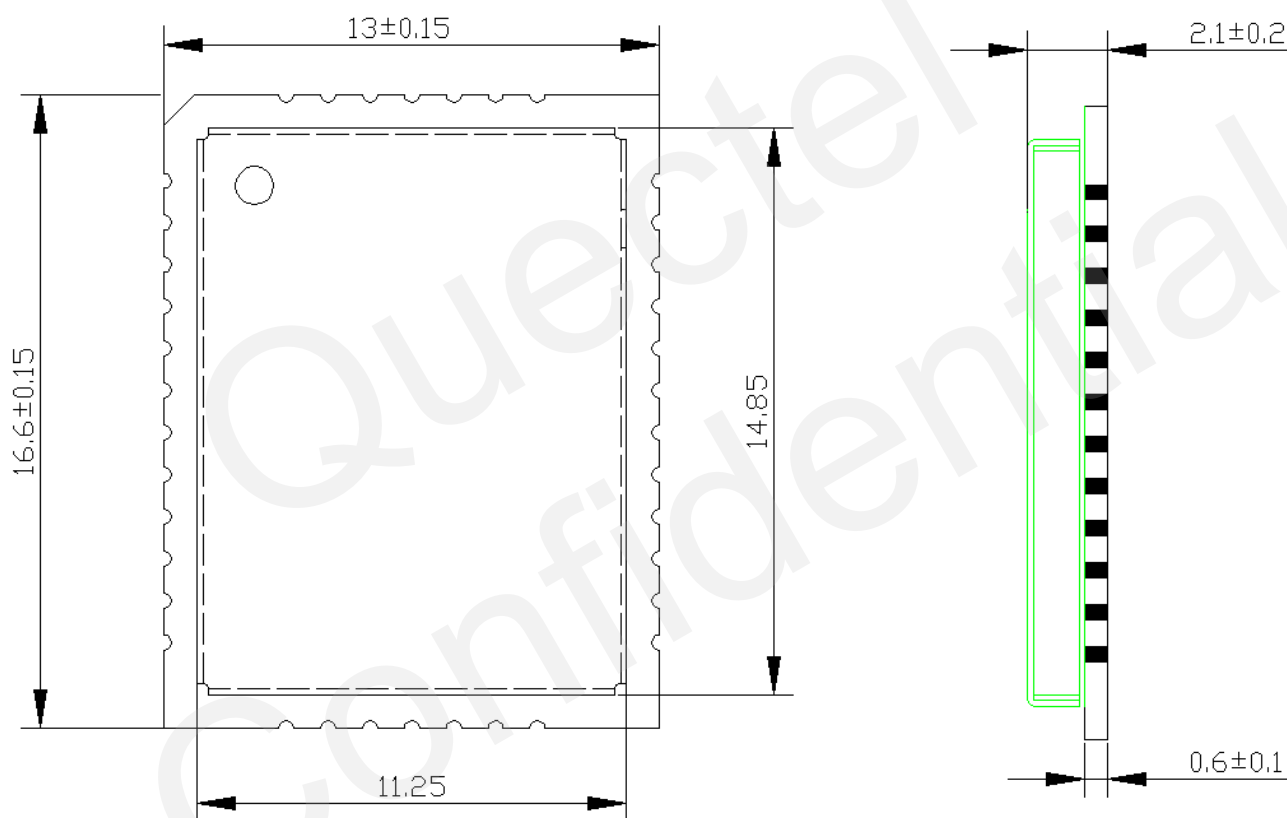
FC20 Top and Side Dimensions (Unit: mm)
